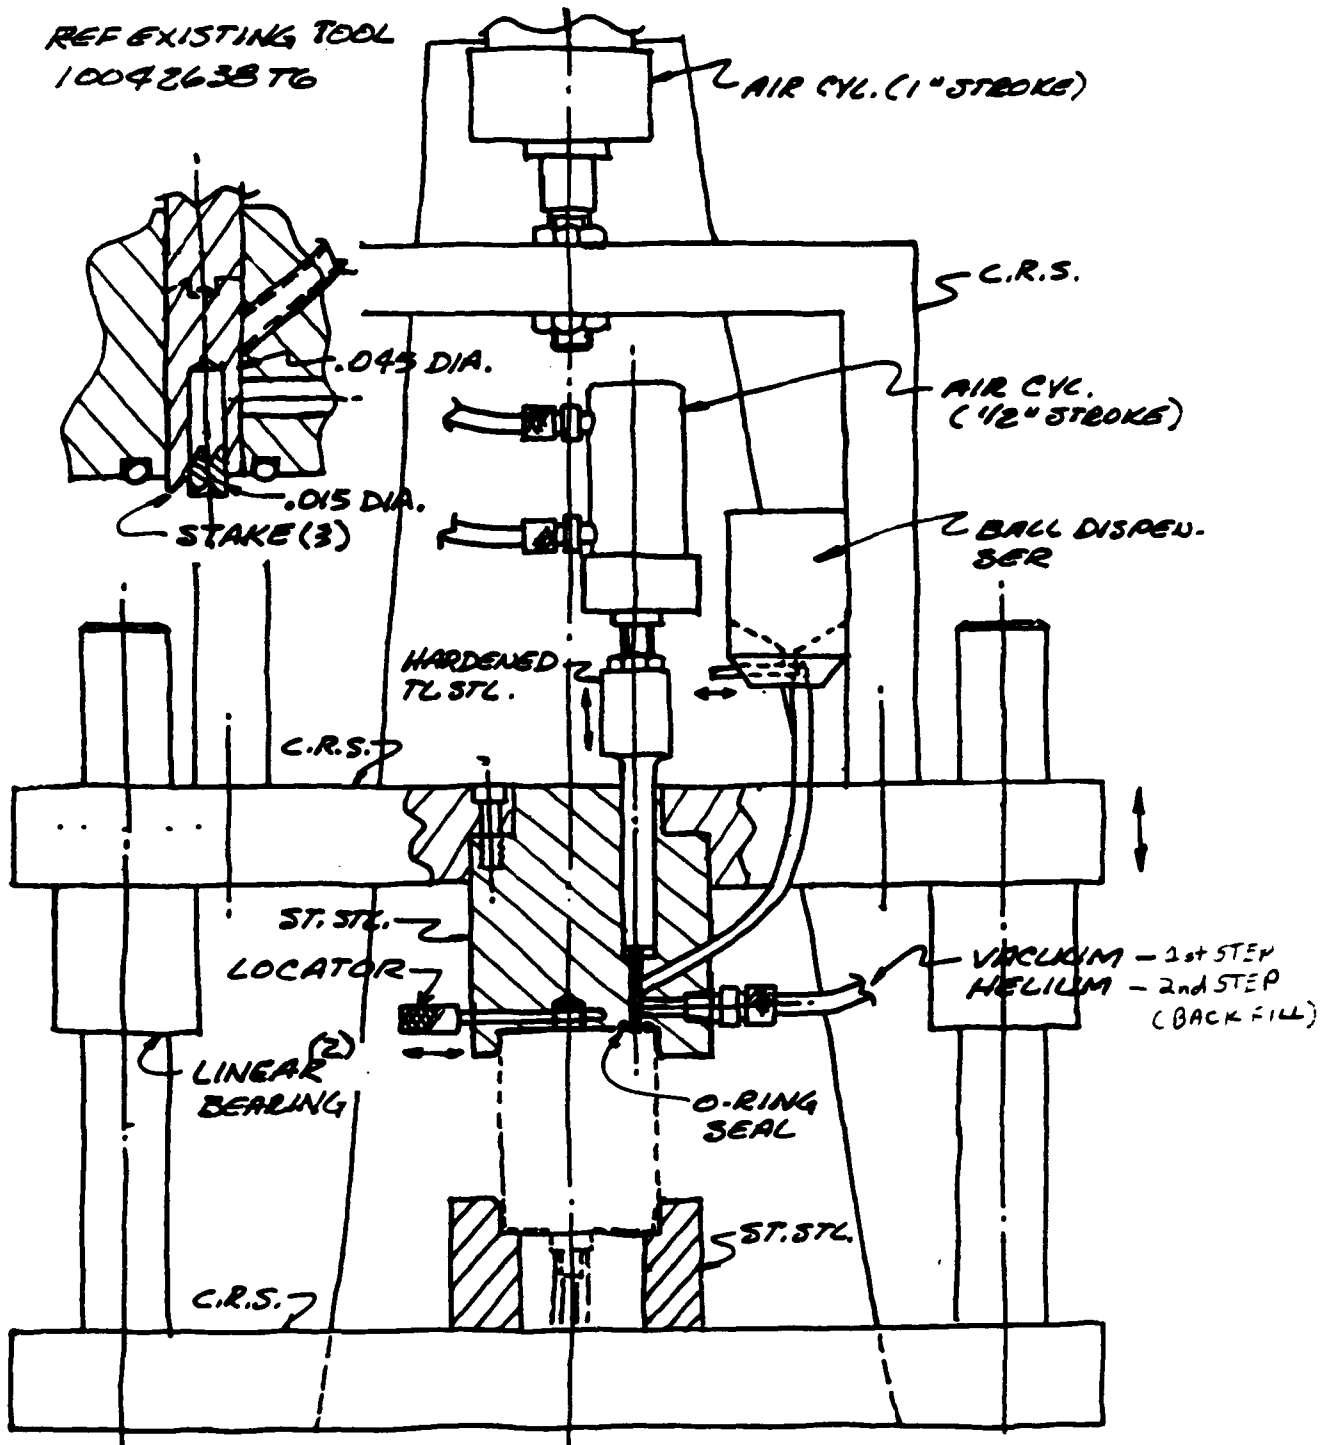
Integrated Fill and Sealing Press (Gimbal Subassembly GG1111)
